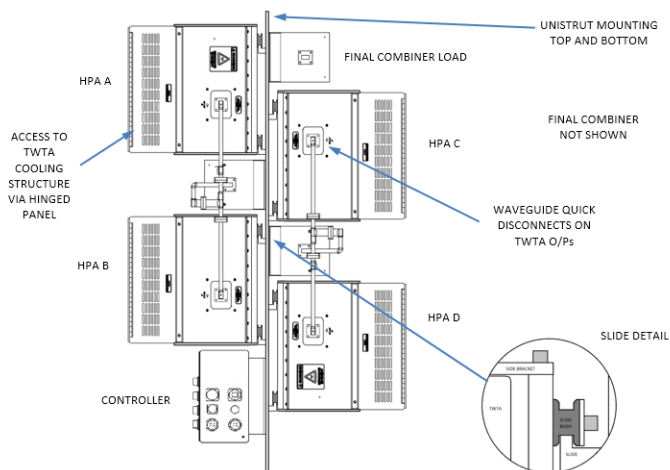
4 Way Continuous Power System – Outline (Output Elevation)
